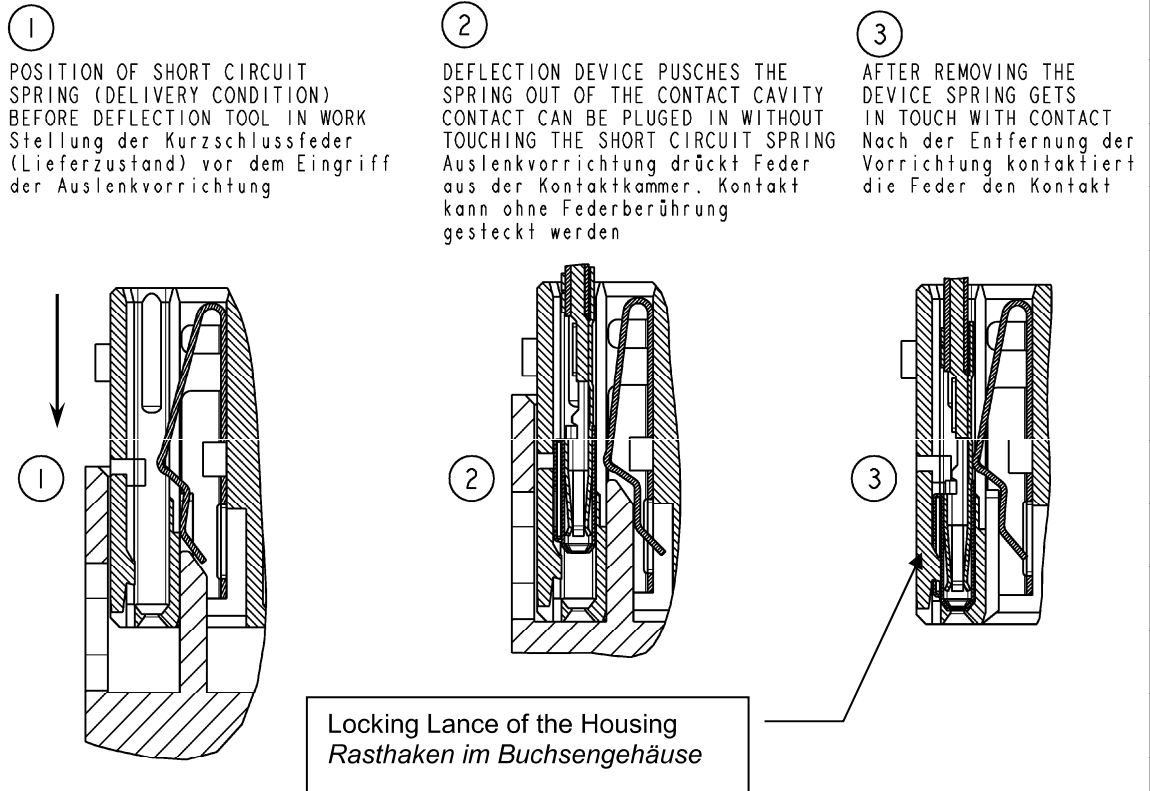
, 5-2, 5-3: INSERTING CONTACTS - DETAILED VIEW
